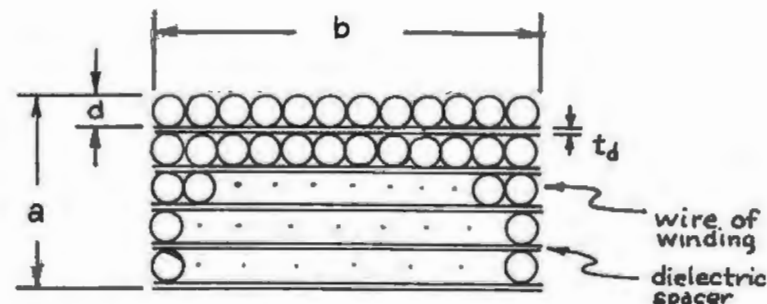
Cross-section of a winding showing dimensioning.
